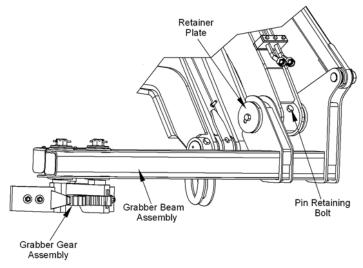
Grabber Beam and Gear Assemblies with Retainer Plate and Pin Retaining Bolt
